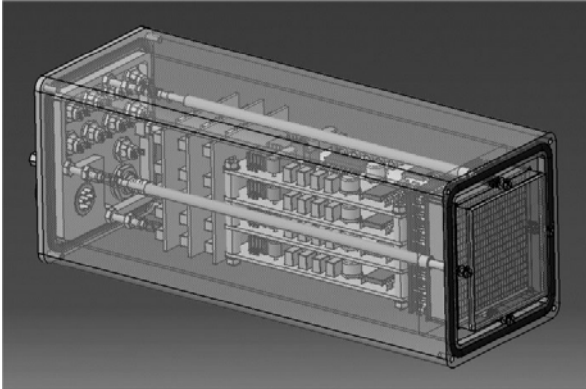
Three dimensional view of the detector assembly showing scintillator, disperser, PM, network and housing
